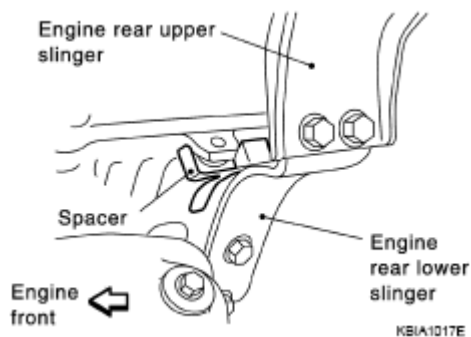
Inserting Spacer Between Cylinder Head And Engine Rear Lower Slinger
